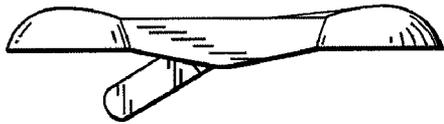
is a rear elevation view of the buckle of FIG. 1 with the attaching-bar rotated perpendicular to the buckle frame.
